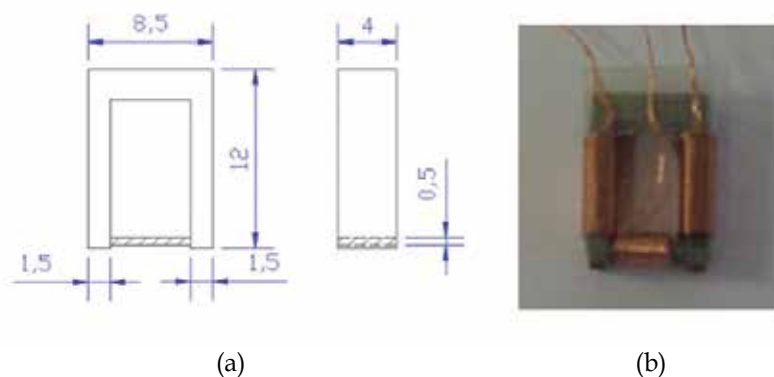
Dimension (a) and photograph (b) of U-shape sensing yoke
